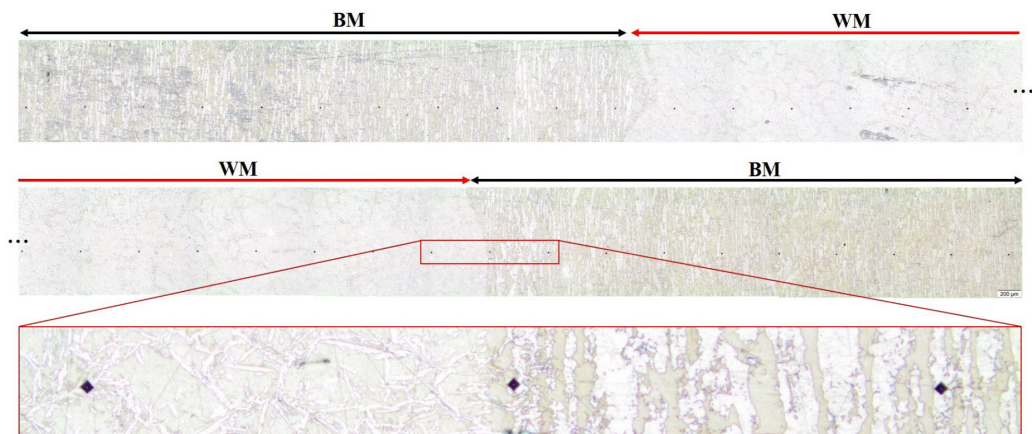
Microhardness profile ($HV_{0.05}$) carried out along the surface of the welded samples, perpendicular to the weld bead. Indentations were performed every 0.5 mm.
